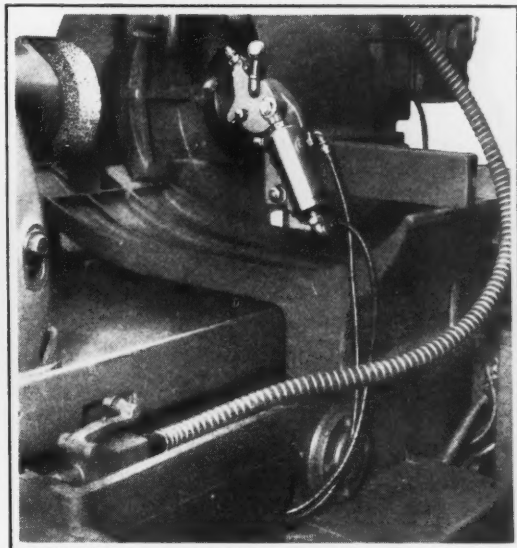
Swinging Wheel-truing Device which is Hydraulically Operated
